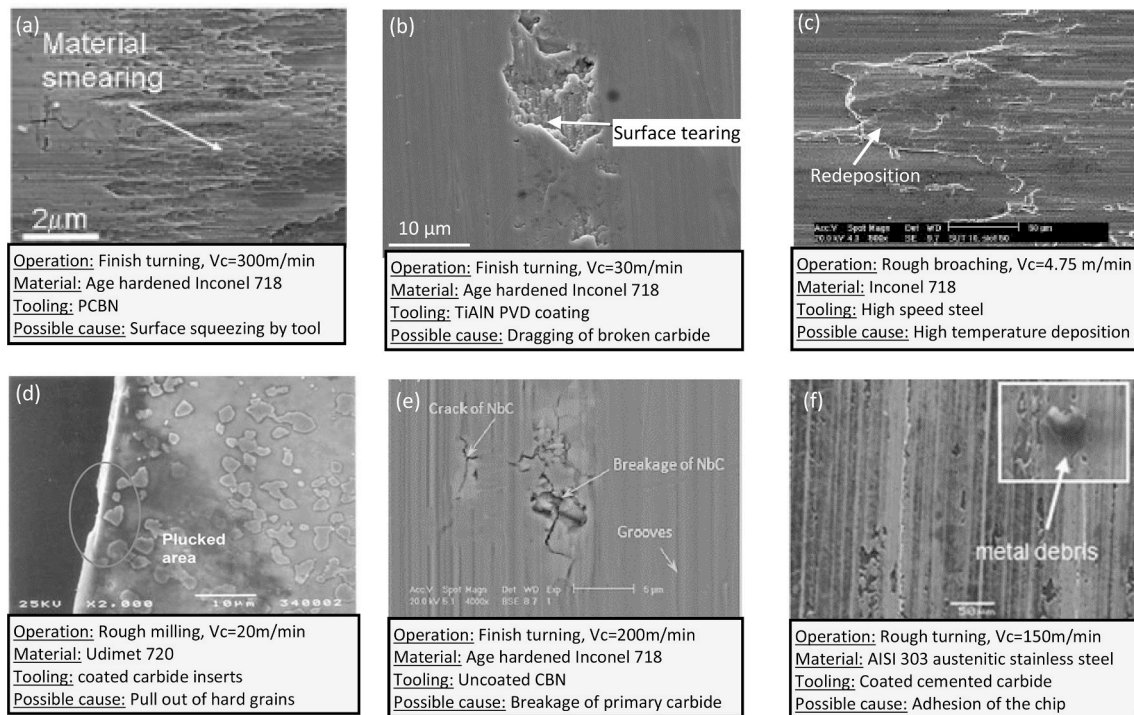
Examples of geometrical anomalies in conventional machining of metals: (a) material smearing [77], (b) surface tearing [135], (c) redeposition [137], (d) pluck [141], (e) crack [134], (f) metal debris [138].
